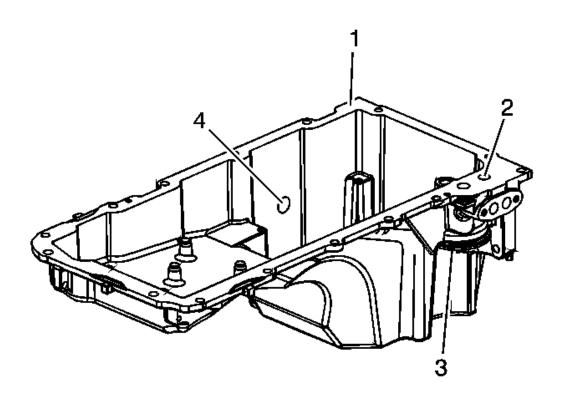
View Of Oil Pan Cover, Bolts & Gasket Courtesy of GENERAL MOTORS CORP.
